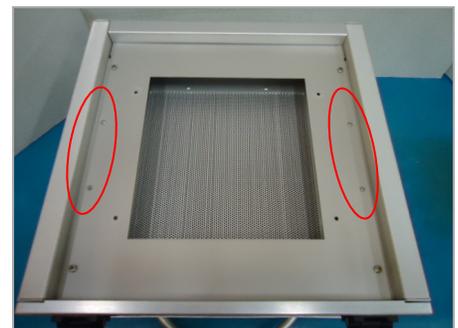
Light Shield Top Cover, Remove Center M4 x 8 mm Screws
